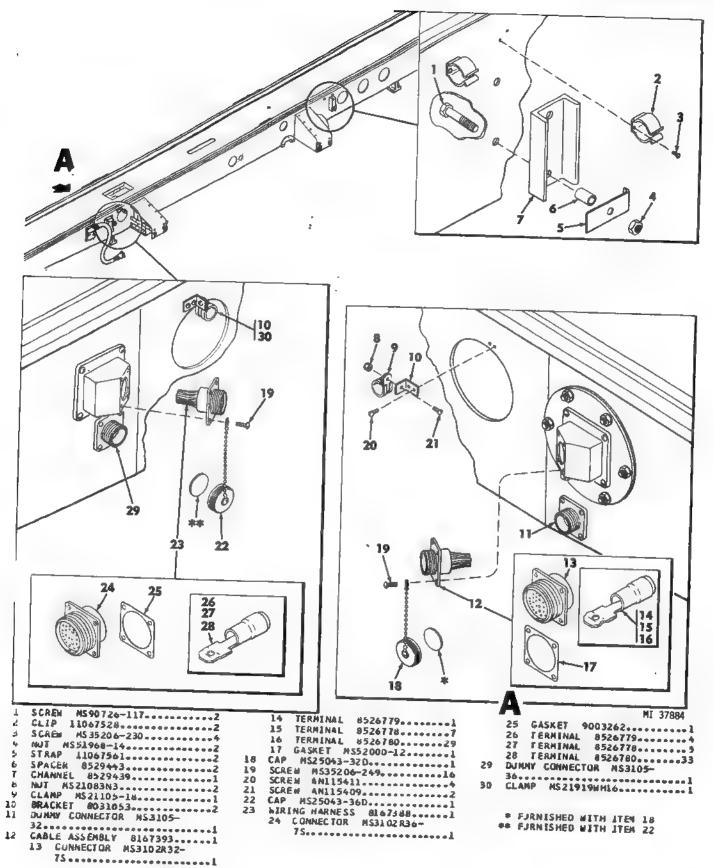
ELECTRICAL INSTALLATION, LAUNCHING RAIL /0167172/
